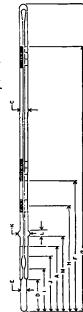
Test Gage for Checking Enlargements on Thermometers
